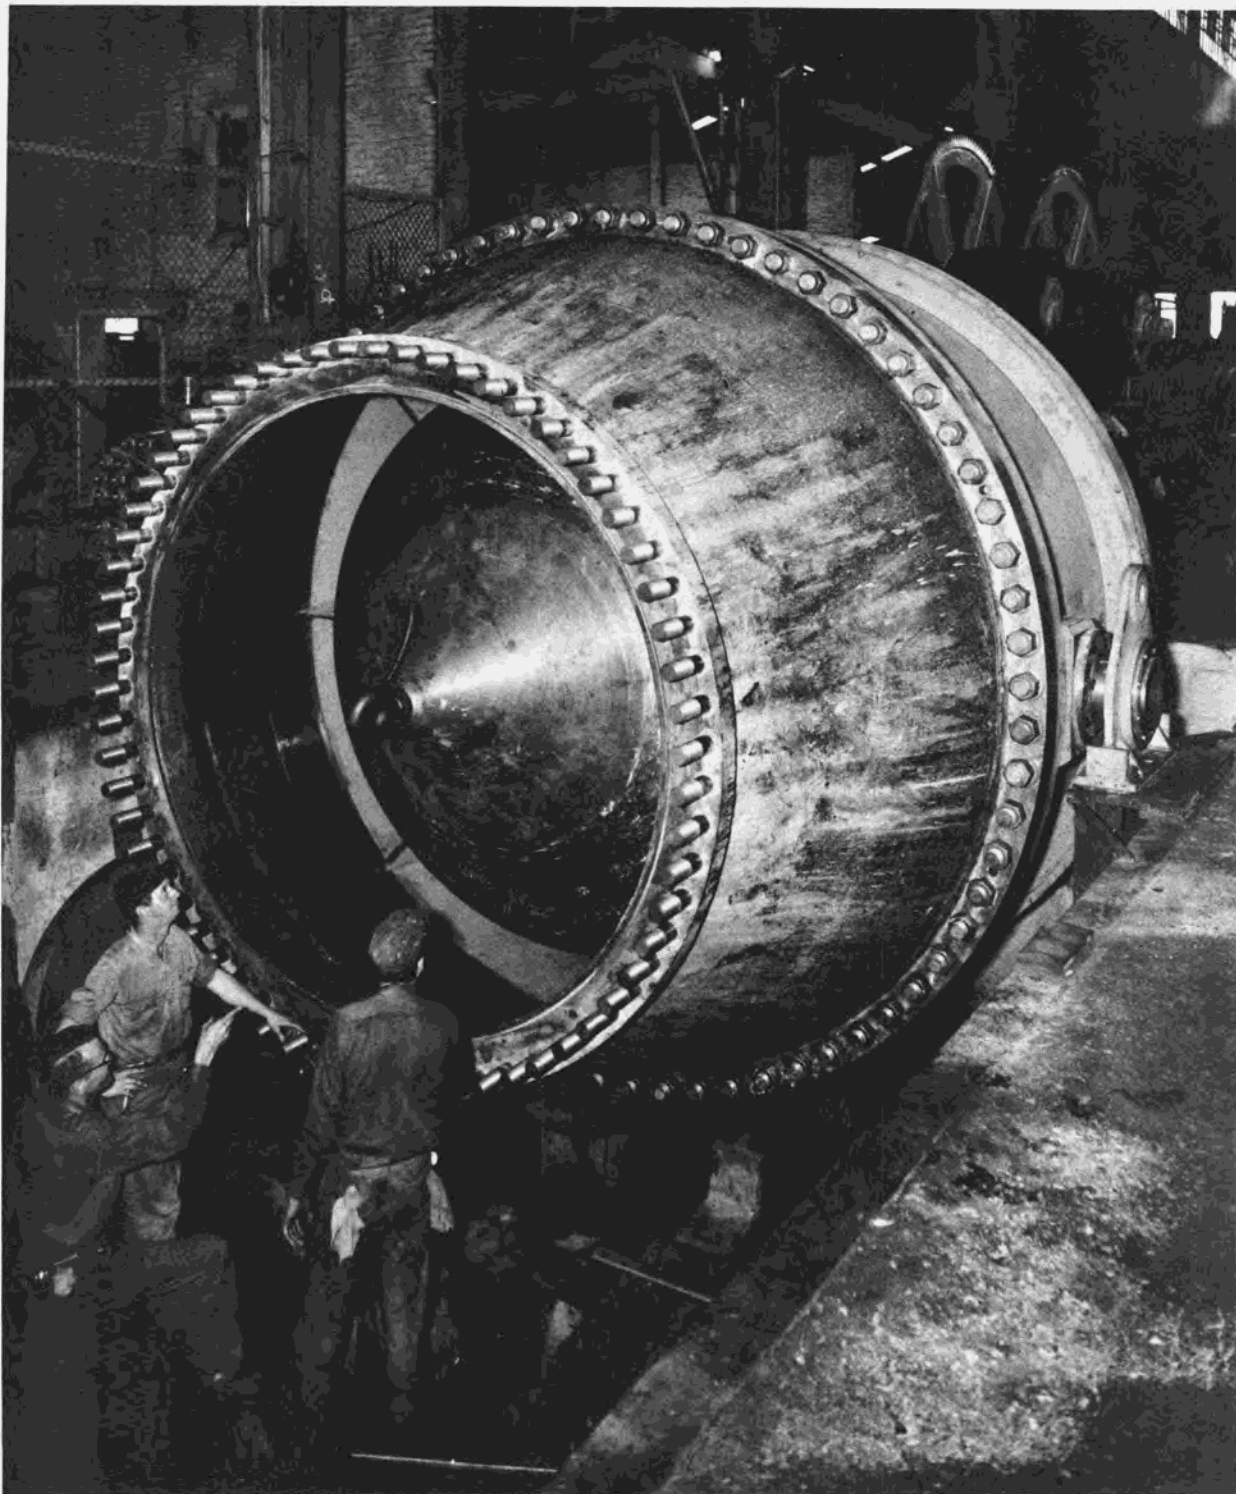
Downstream view of 96-inch hollow-jet valve.
